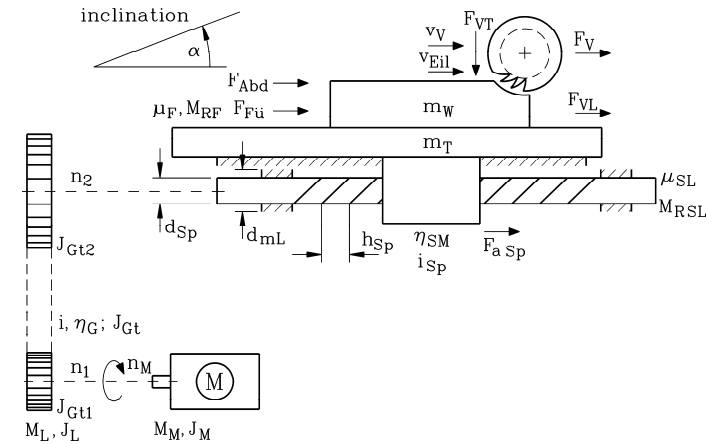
Linear movement of a table (mass m_T) with a working piece (mass m_W) during a milling process. A rotating servo motor M with belt gear (gear ratio i) drives a screw ball spindle, which converts rotating movement into linear movement.
